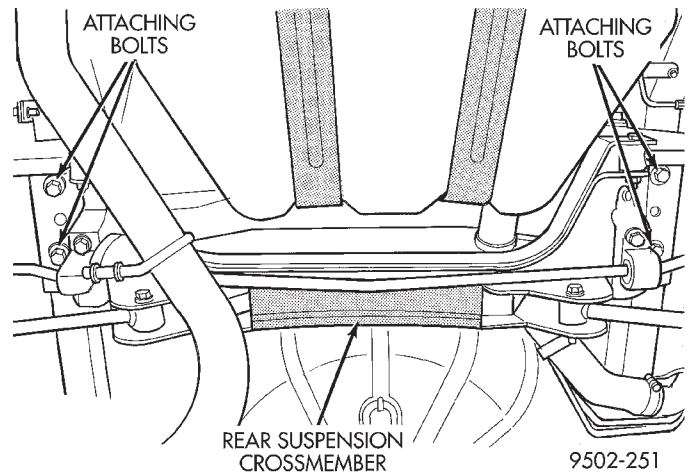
Suspension Crossmember Attachment To Frame Rails
